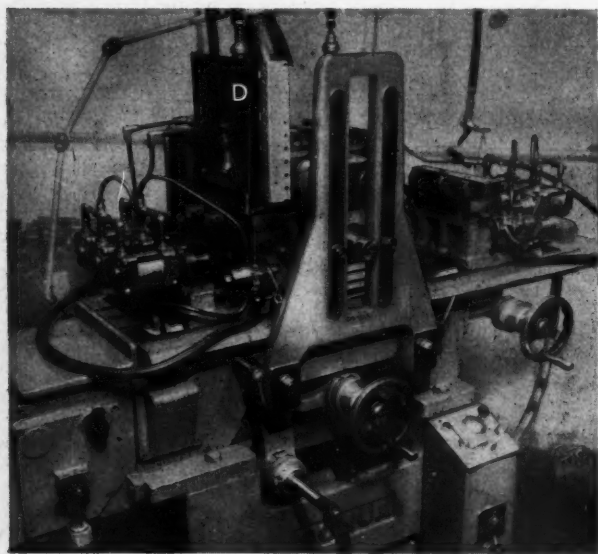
This Somua horizontal milling machine is installed in the Wolverhampton works of Lang Pneumatic, Ltd., and is fitted with twin air-operated fixtures for plunge-milling operations on cores for solenoid-operated reversing valves
